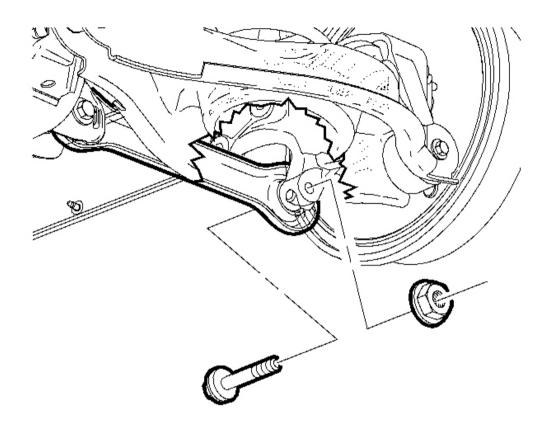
Toe Link, Knuckle Bolt & Nut Courtesy of GENERAL MOTORS CORP.
